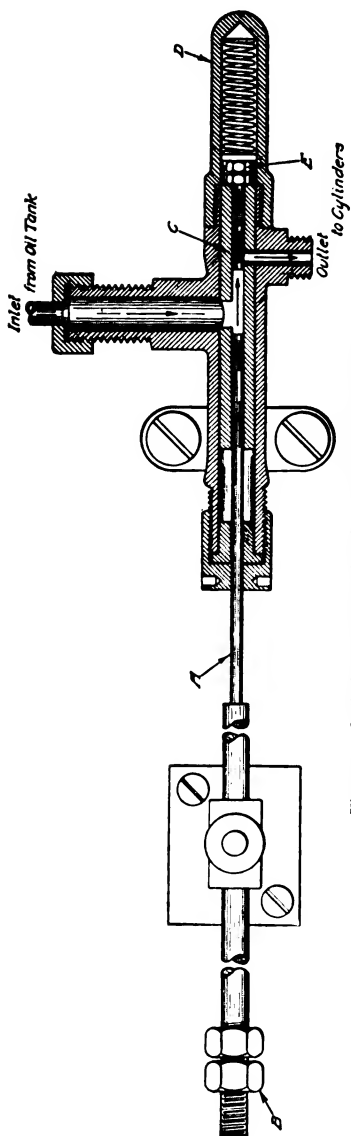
Cylinder Oil Pump Used on Stanley Steam Cars
